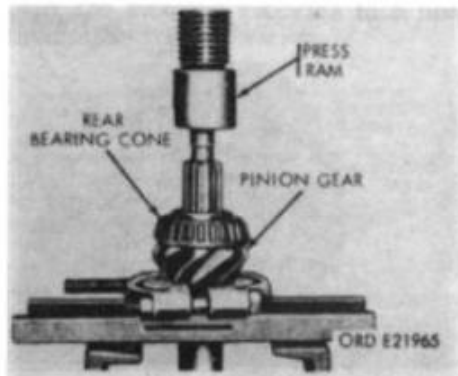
Removal of through shaft pinion gear and rear bearing cone
